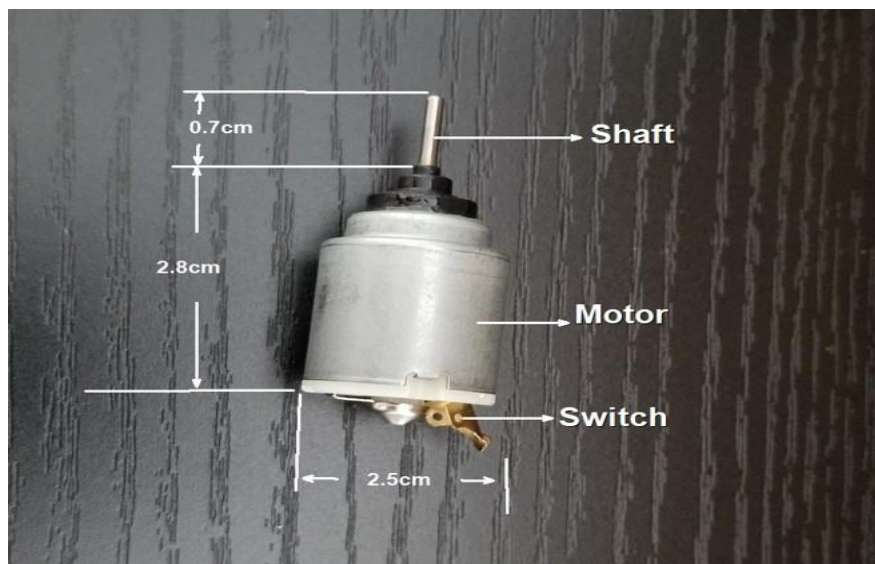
Showing the dimensions and parts of the motor used in the swimming penguin.
